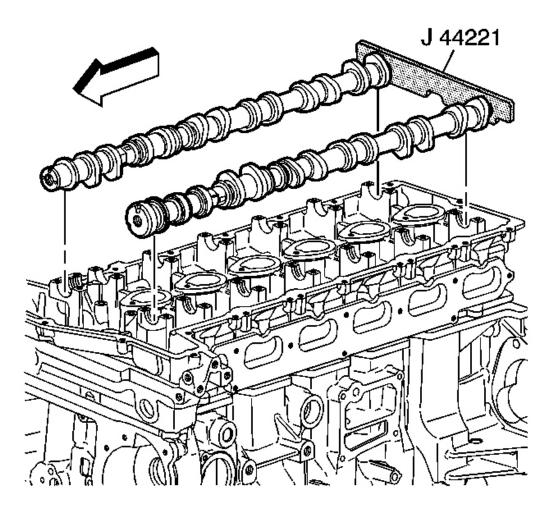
Installing J 44221 Onto Camshafts Courtesy of GENERAL MOTORS CORP.
